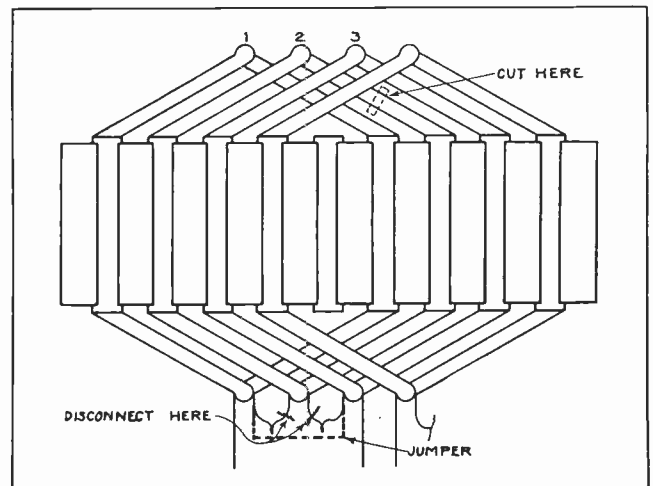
This diagram illustrates the method of cutting out a defective coil with a jumper. In this manner a machine can be quickly repaired and kept in service until such time as the defective coil can be replaced.
